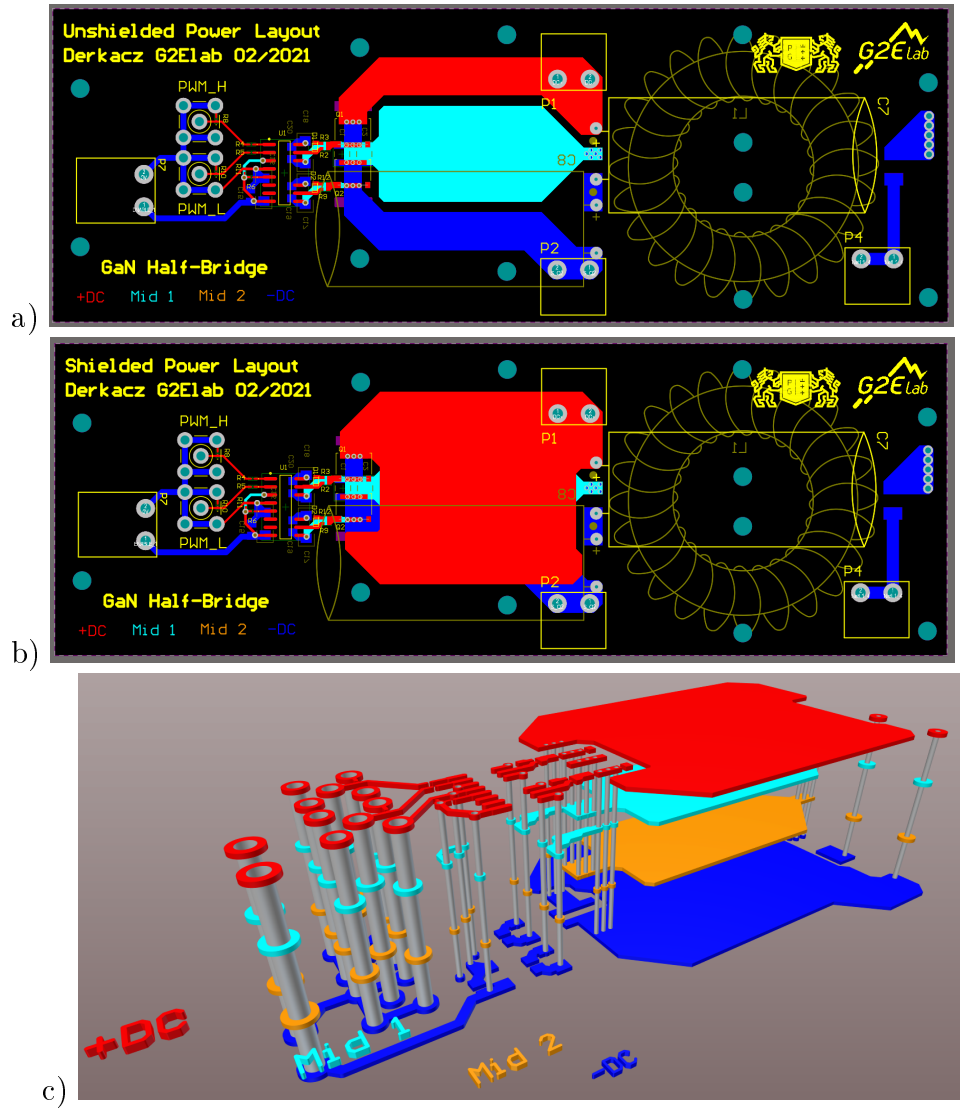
View of the demonstrator with middle track: a) unshielded, b) shielded, c) exploded 3D view of shielded PCB: sandwich between DC+, middle point and DC-, (thickness of the board in scale 10:1) (colors: Red - Top Layer, Blue - Bottom Layer, Yellow&Cyan - Middle Layers)
